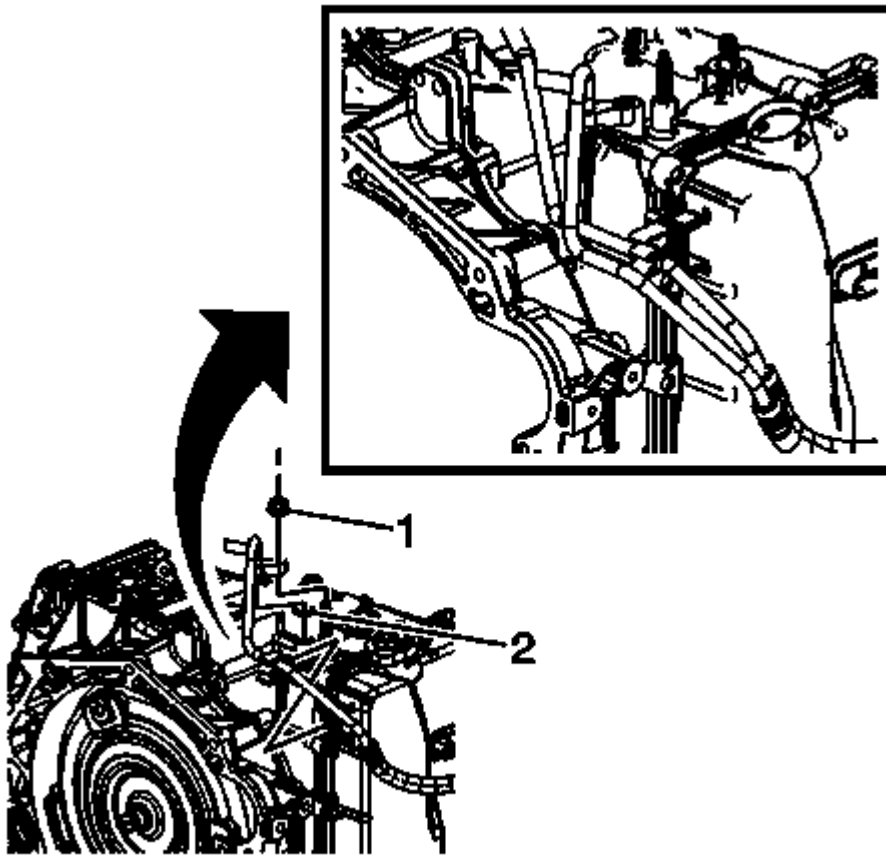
Identifying Transmission Fluid Cooler Inlet Hose Components
